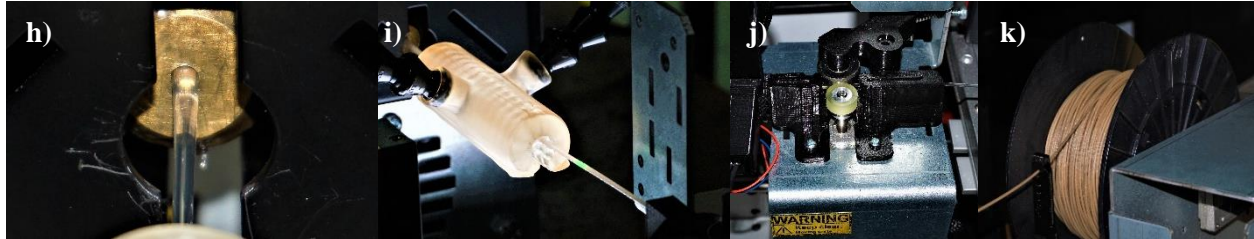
Spool: (h) 1.75 mm die; (i) cooling; (j) drawing; and (k) spooling.
